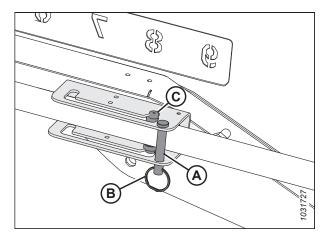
Outer Left Arm Cylinder - Aft Position
